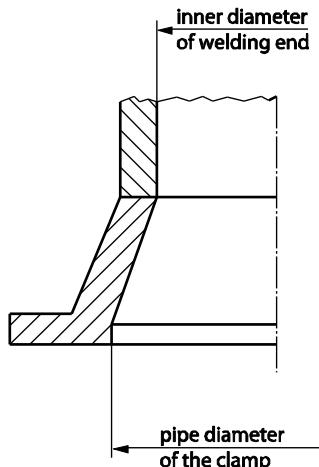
Principle of inner diameter for clamp and welding
